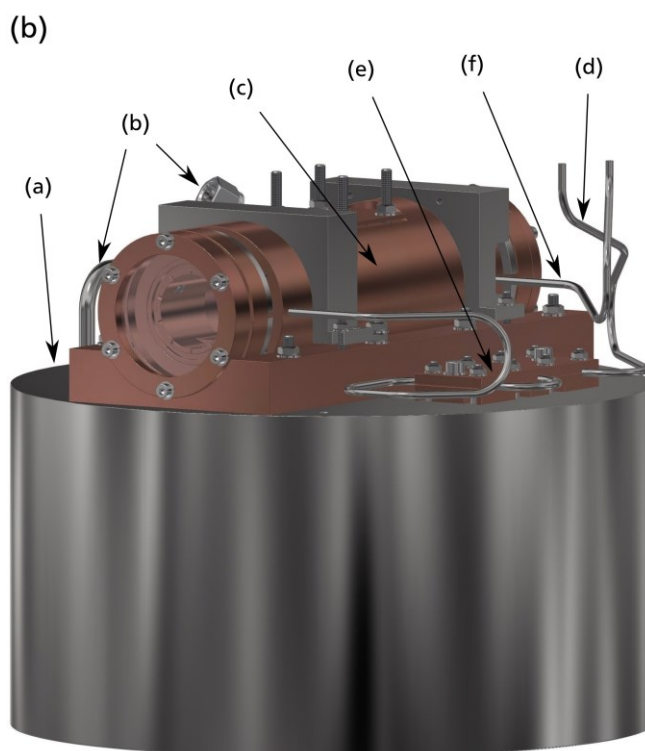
CAD Drawings of the Cluster Source Assembly
